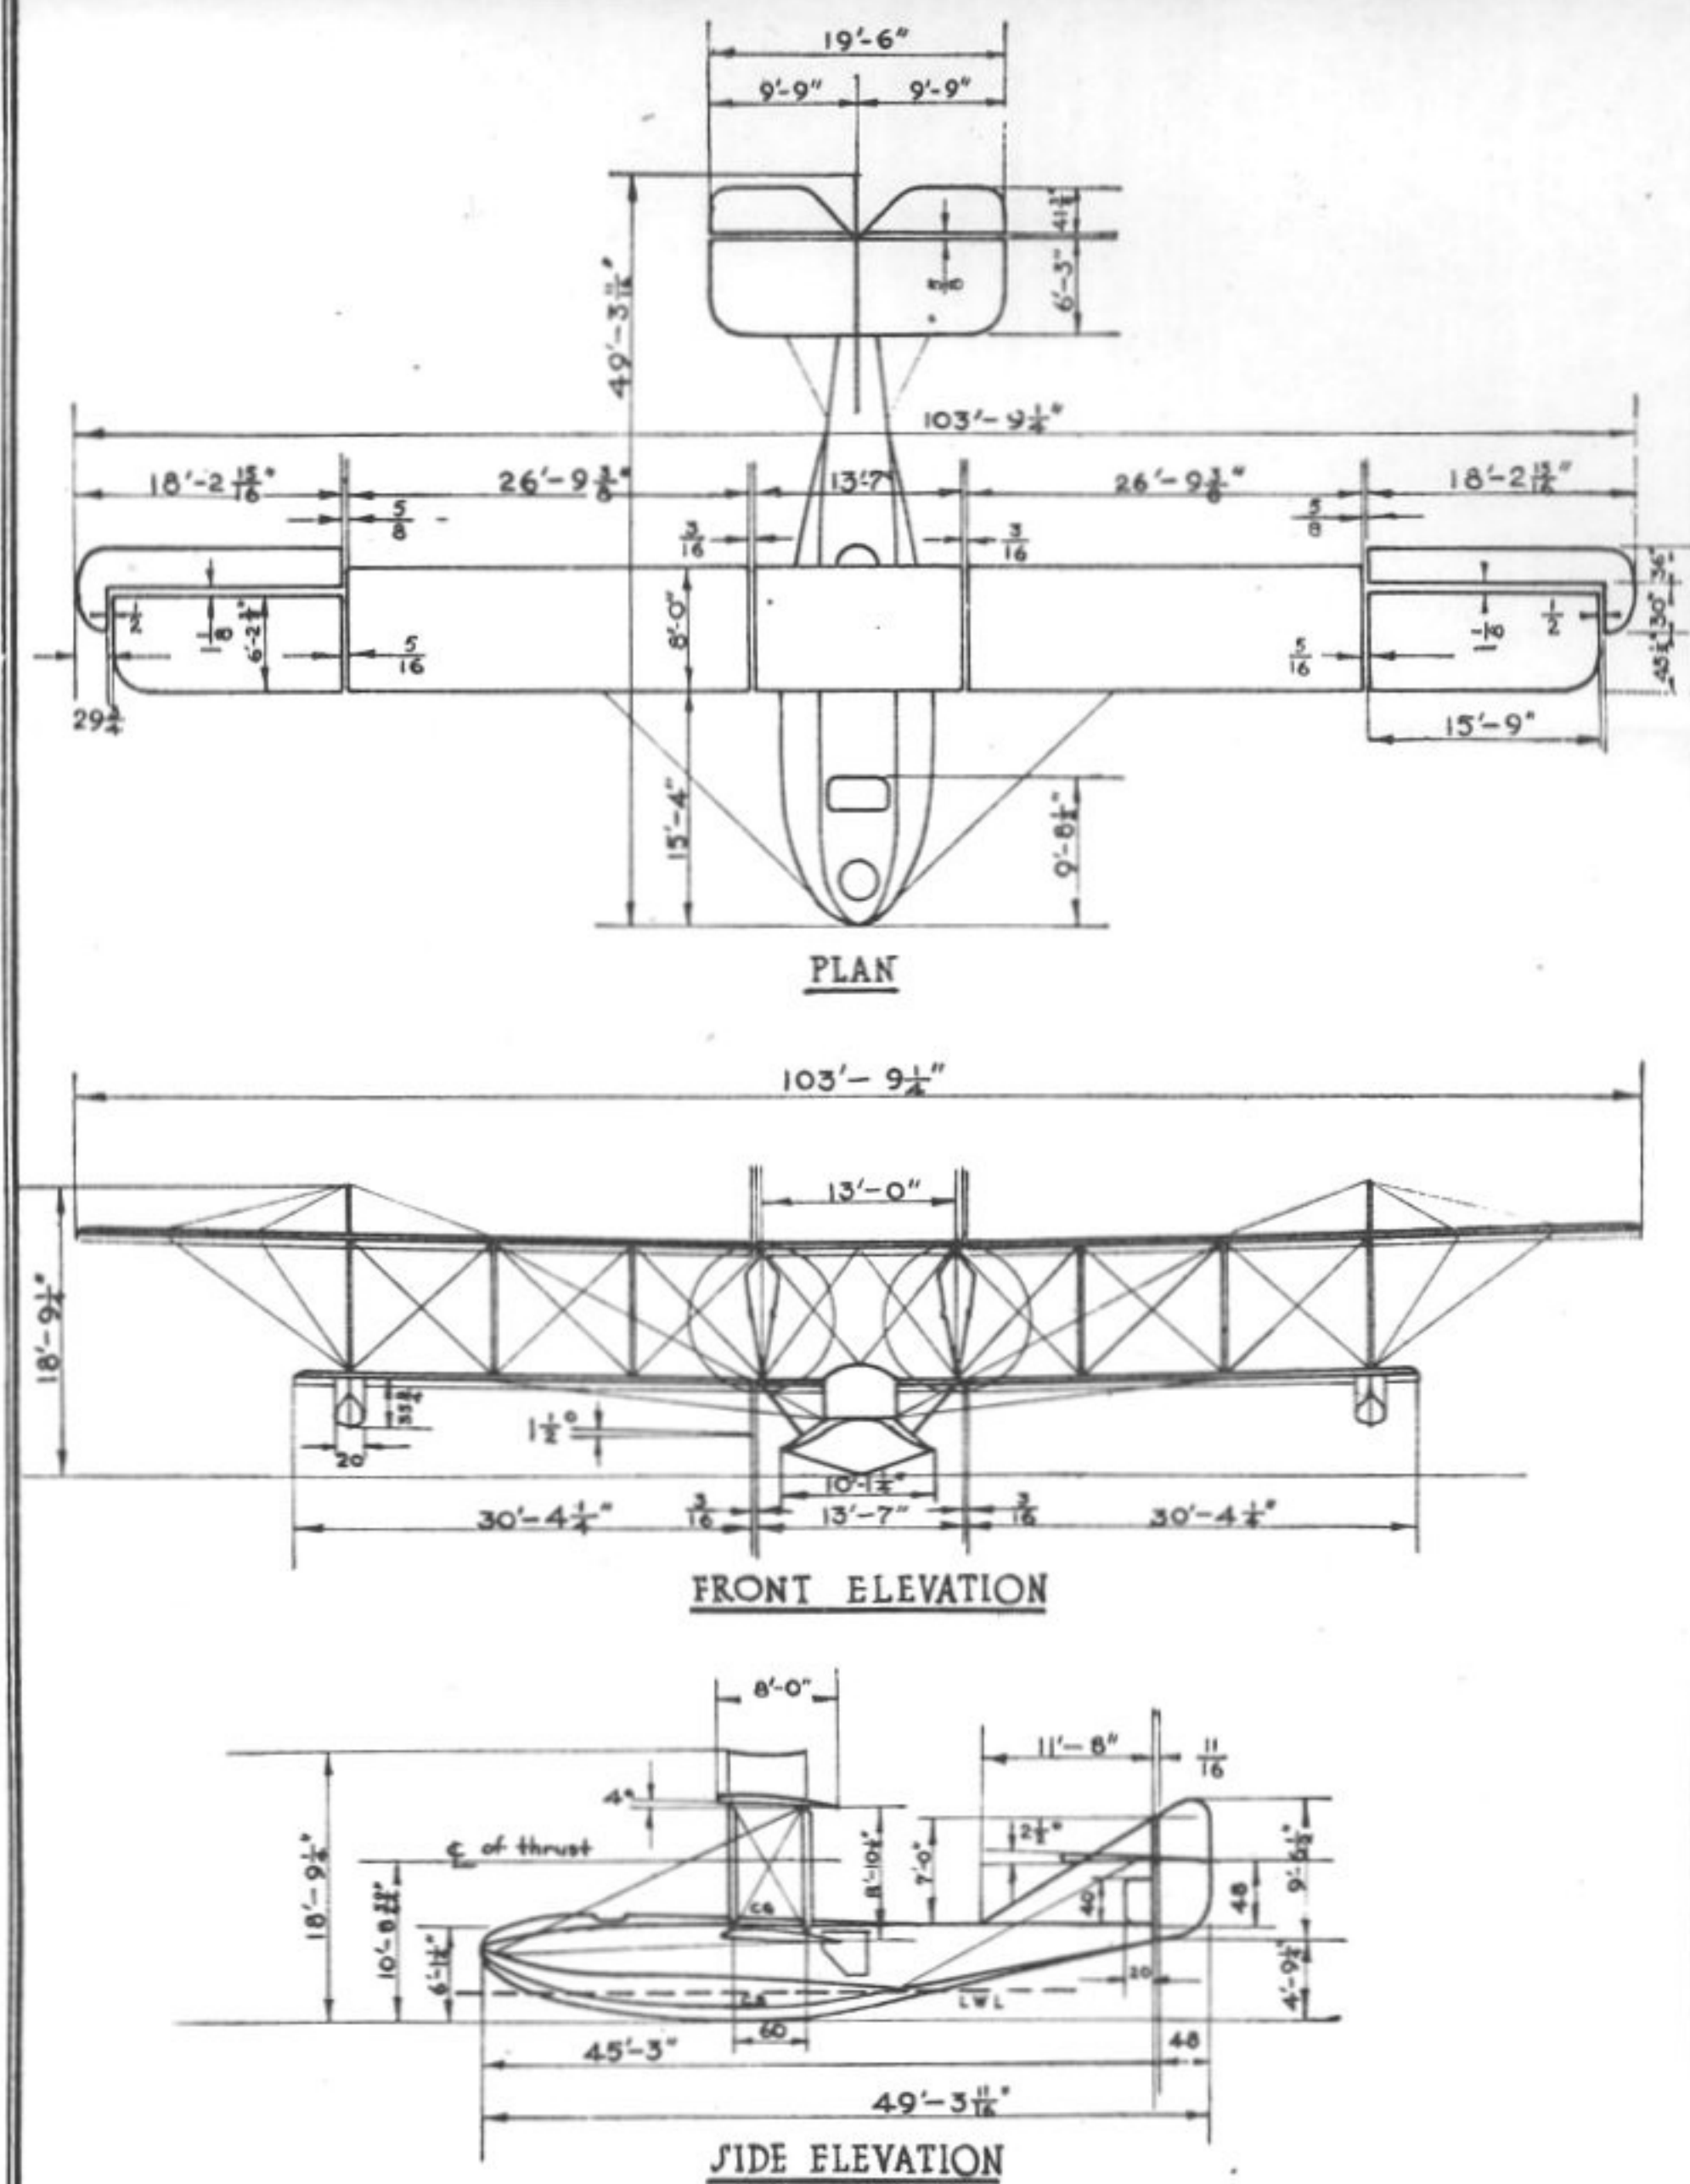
GENERAL ARRANGEMENT PLANS.
